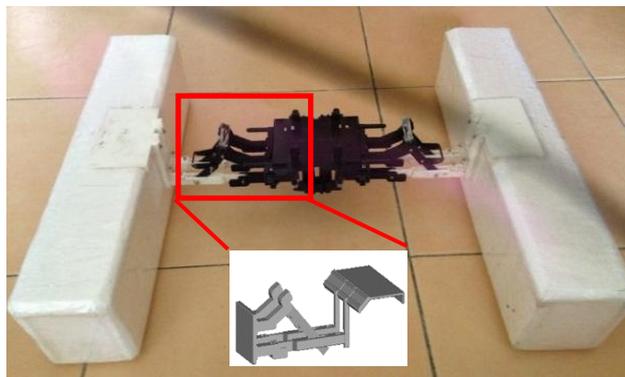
Overall assembly wings with insets showing retractable middle part design
